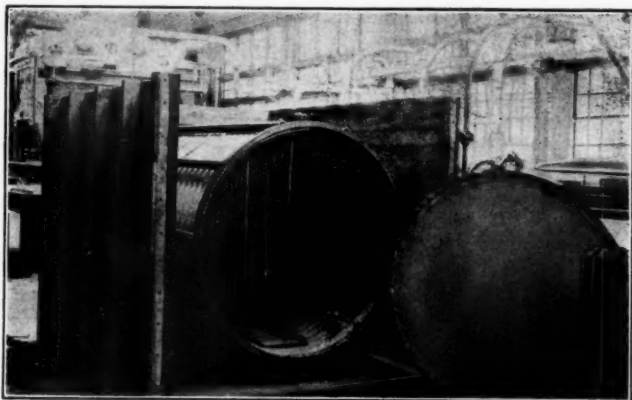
VACUUM TANK WITH COVER REMOVED.
